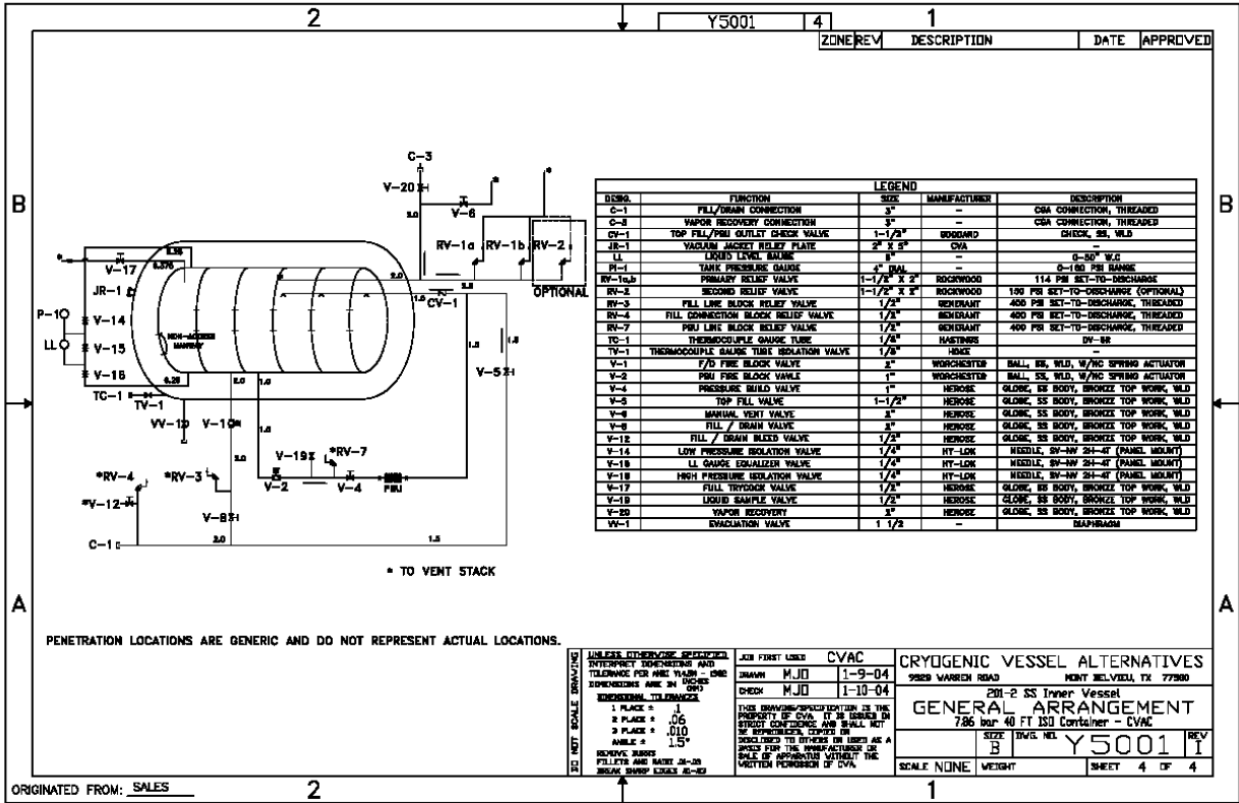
Piping Arrangement of CVA ISO storage Tank
